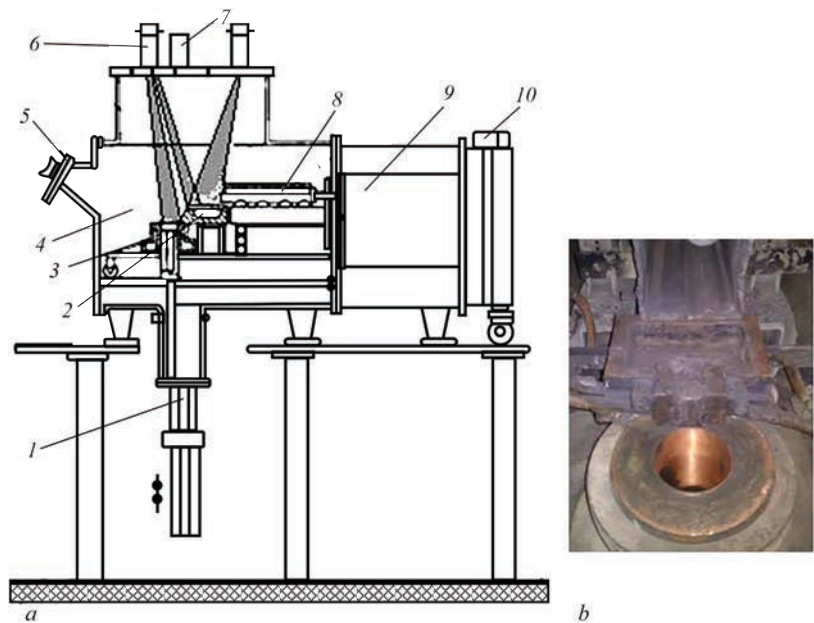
Schematic of the UE-208M electron beam installation (*a*) and appearance of the mould (*b*) [5]: 1 — ingot extraction mechanism; 2 — cold hearth; 3 — mould; 4 — melting chamber; 5 — viewing system; 6 — electron beam gun; 7 — water rheostat; 8 — feed billet; 9 — chamber; 10 — billet feed mechanism
